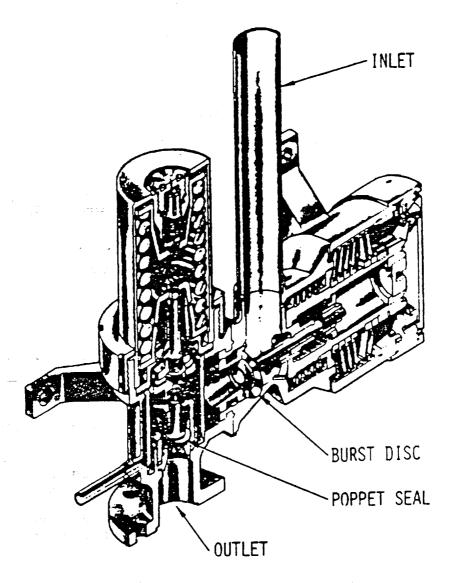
PRESSURE RELIEF VALVE ASSEMBLY
